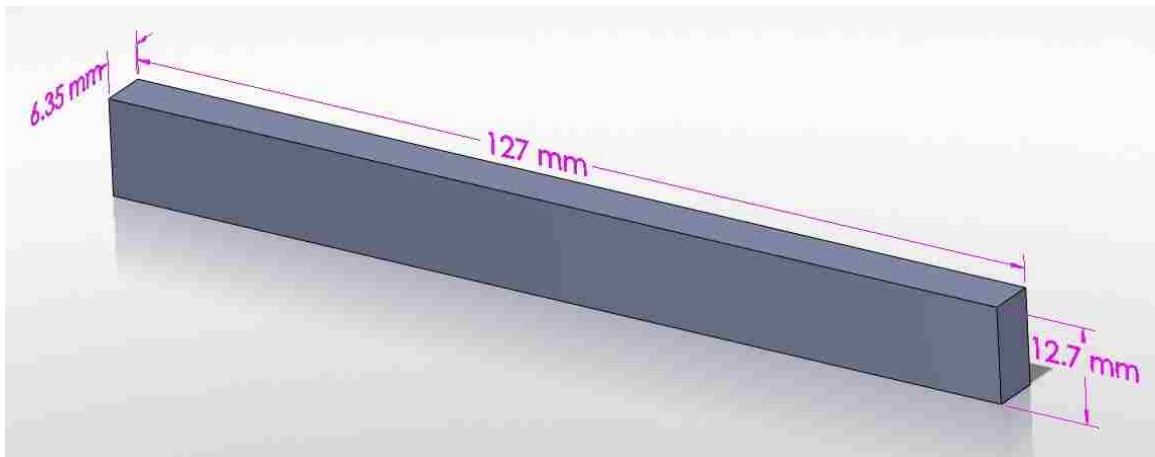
Three Point Bend Test Specimen Dimensions. The dimension of the flexural test specimens listed in the test method are indicated above.
